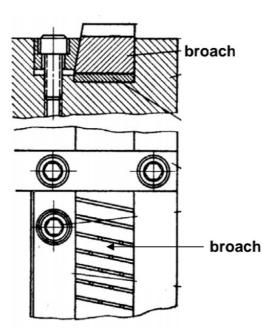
Mounting external broach for surfacing and slotting.
